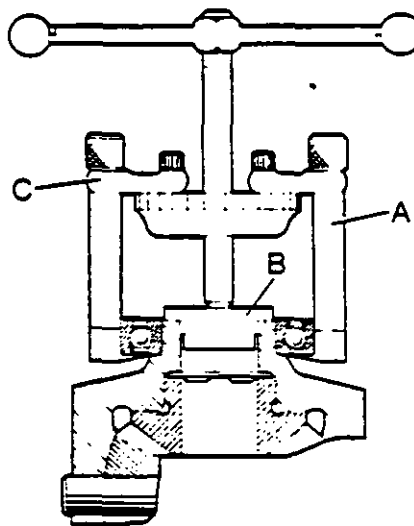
REMOVING DIFFERENTIAL BEARINGS
